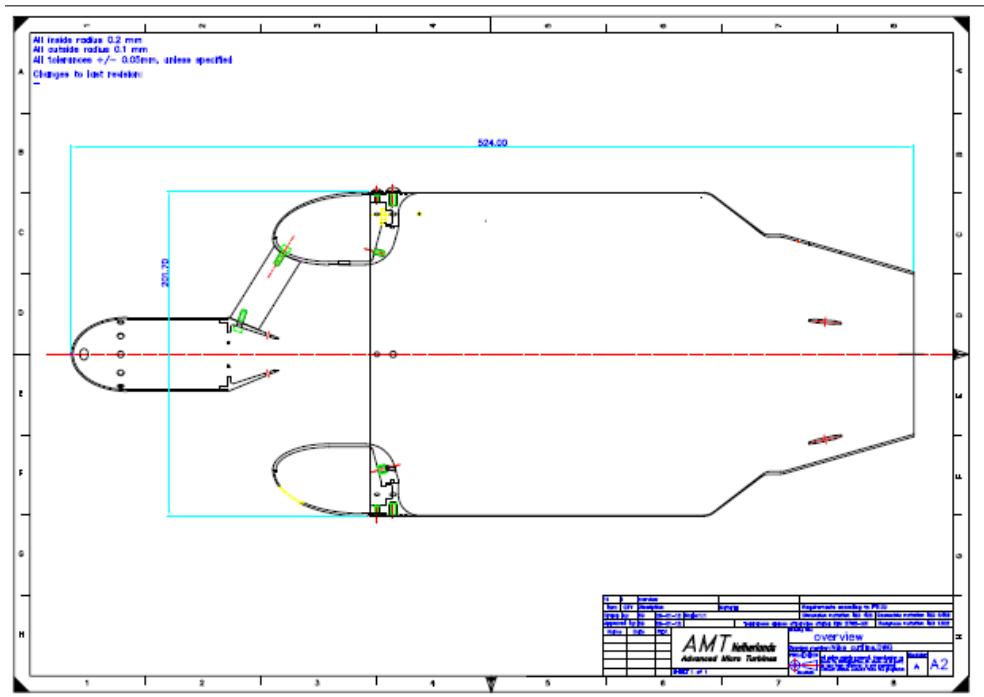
The technical 2-D drawing of the Nike engine [13]
